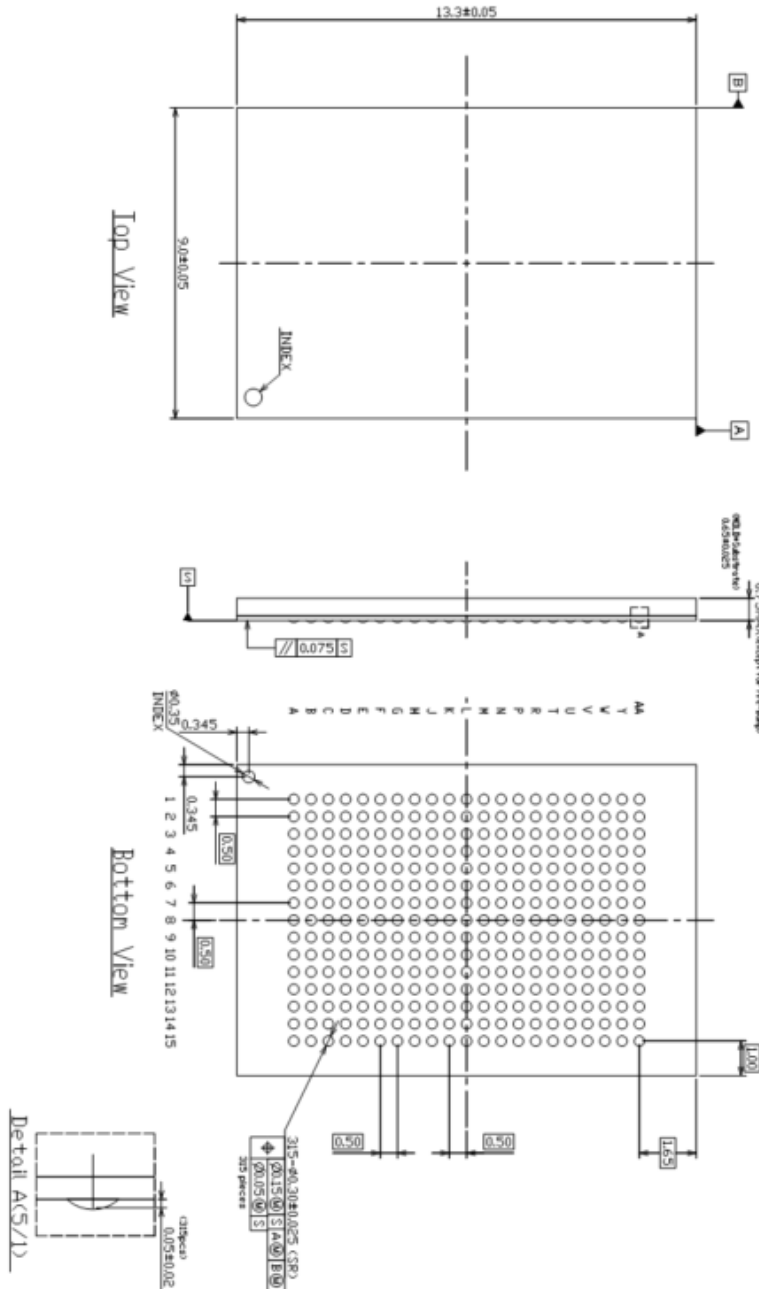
Package Dimension of P-WFLGA315-0914-0.50-001
